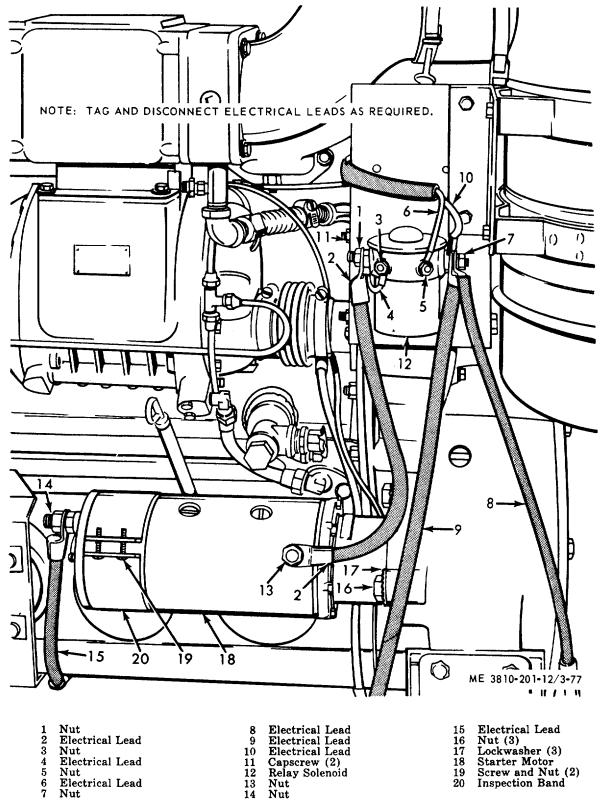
Starter motor, relay solenoid, and inspection band, removal and installation.
